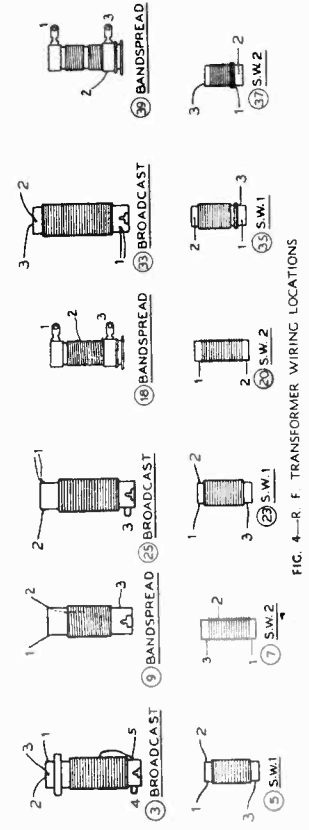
R. F. TRANSFORMER WIRING LOCATIONS
